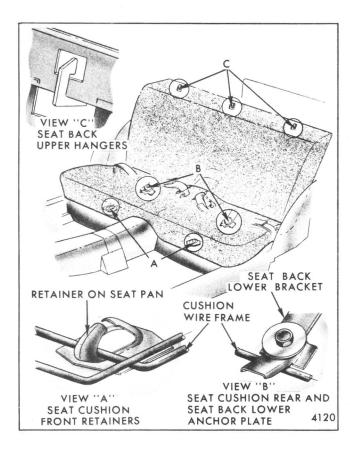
Rear Seat Cushion and Seat Back - "H-11" Body Style
